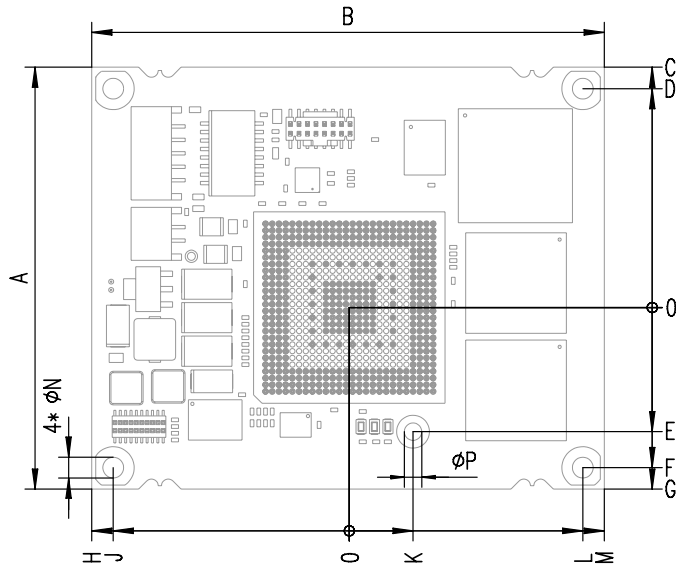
ETK-T2.1C Dimensions - Top View
